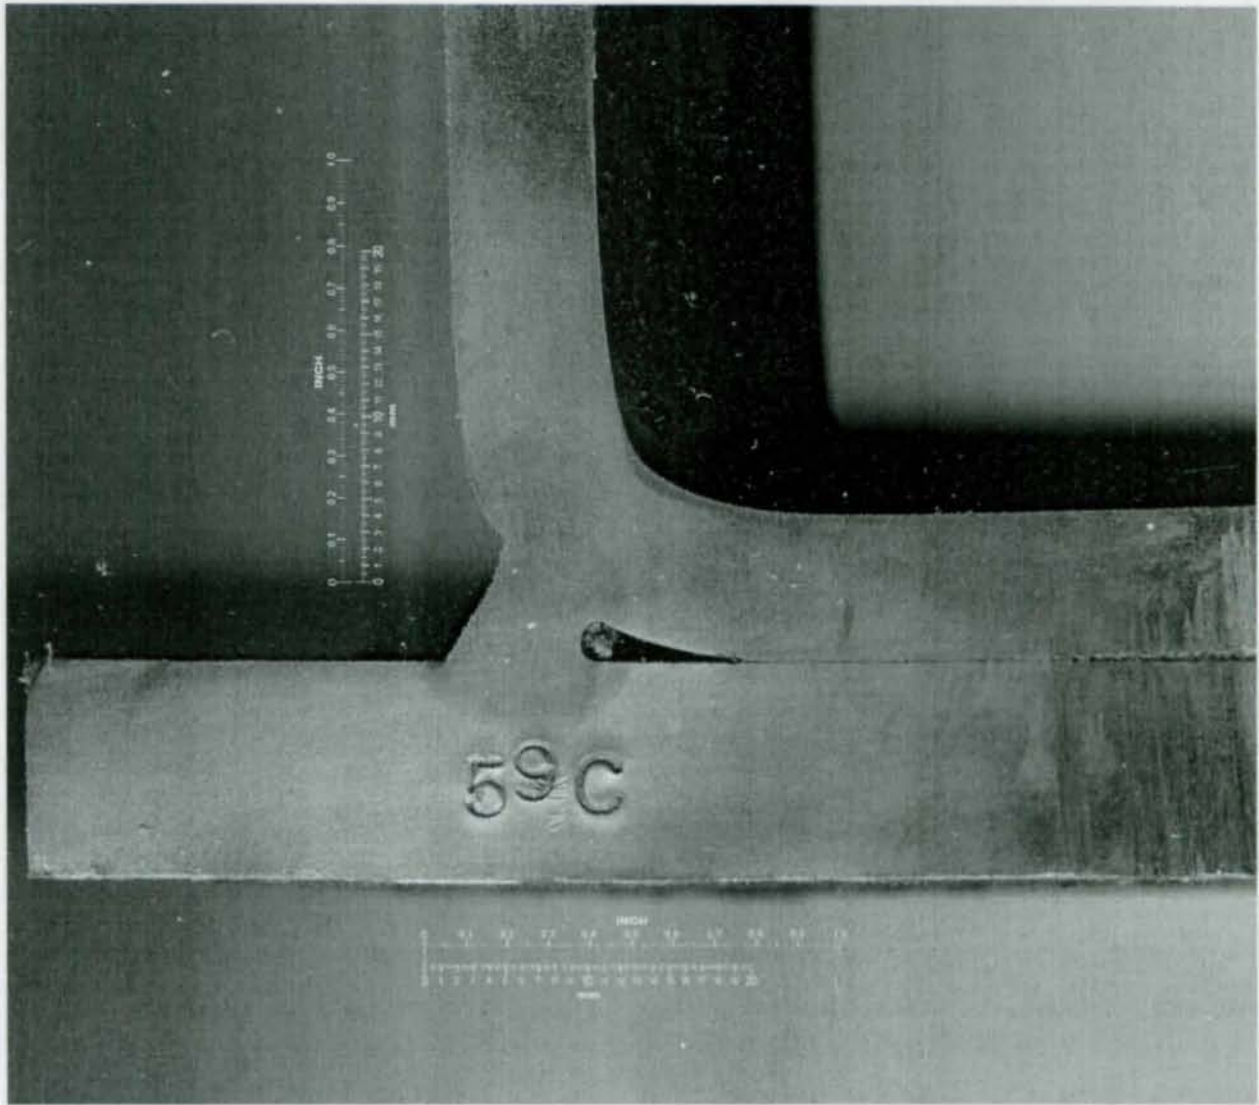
Scanned Image of Test Weld No. 59 Cross-section
